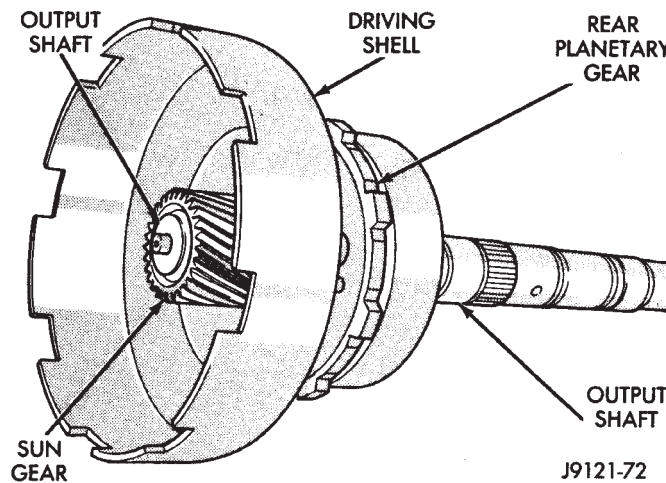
Installing Sun Gear And Driving Shell—46RH
